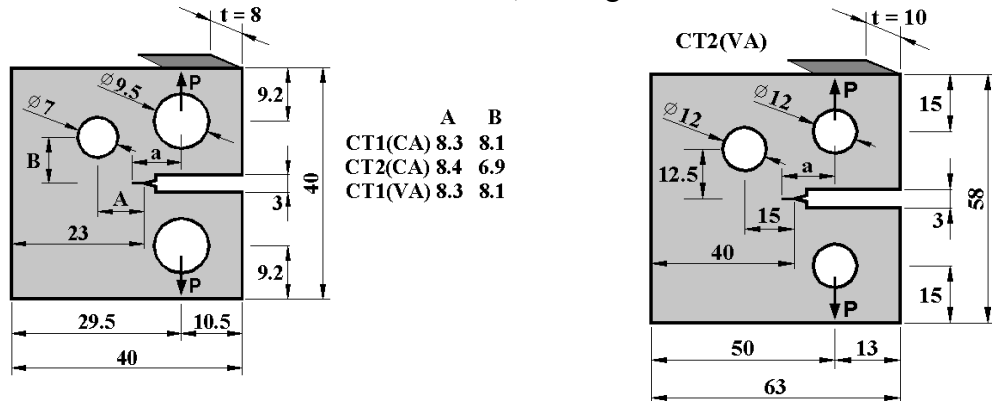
Measured dimensions of the hole-modified C(T) specimens (mm).
